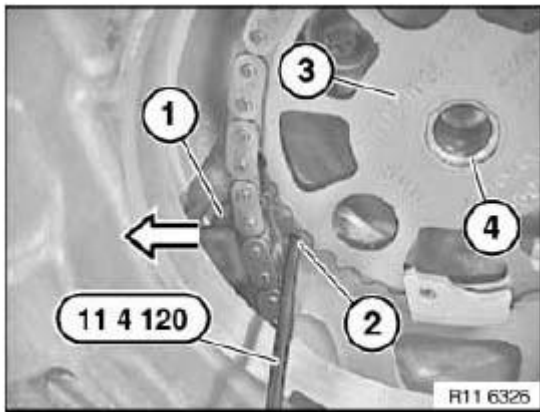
Identifying Special Tool (11 4 120), Sprocket Wheel, Chain Tensioner And Vacuum Pump
